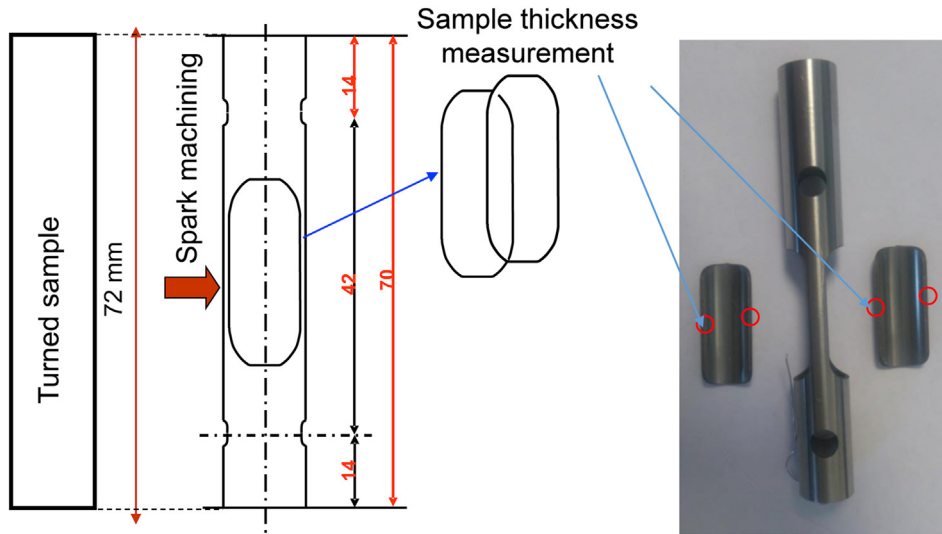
Axial tensile sample geometry and spark machining scraps used for local thickness measurement.
